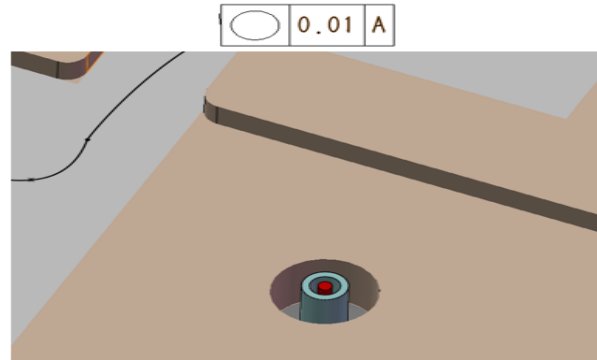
Large Circular Hole tolerance on Top of the midpart
